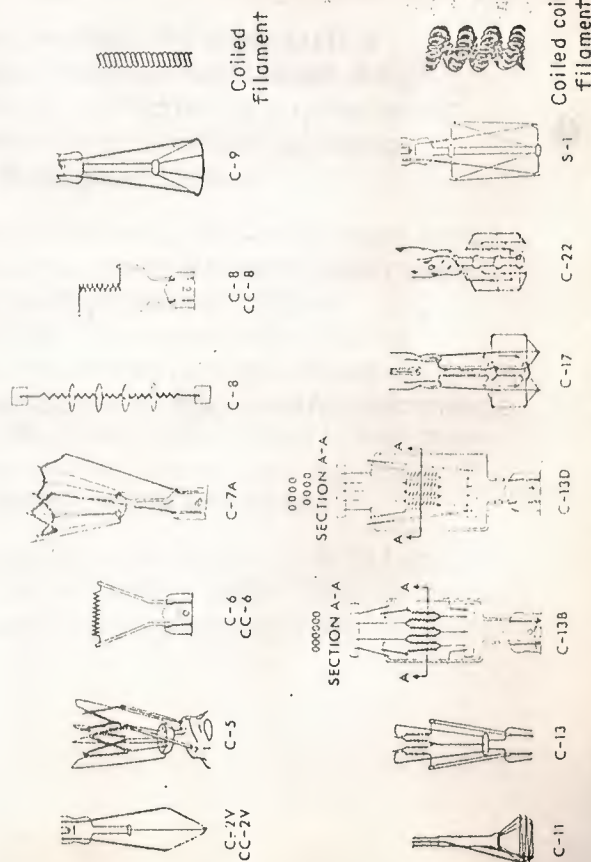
Typical incandescent lamp filament constructions (not to scale).
